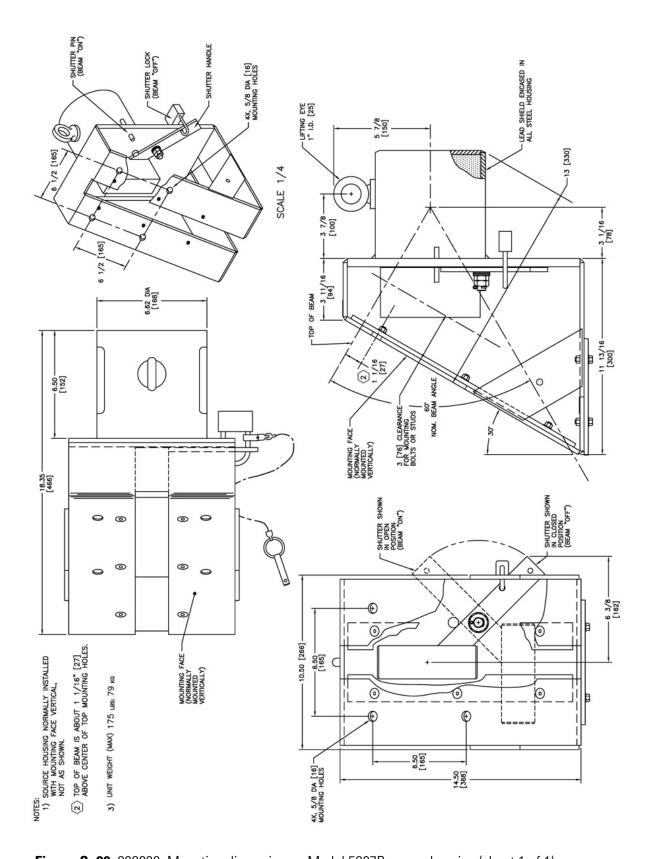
868630: Mounting dimensions - Model 5207B source housing (sheet 1 of 1)
